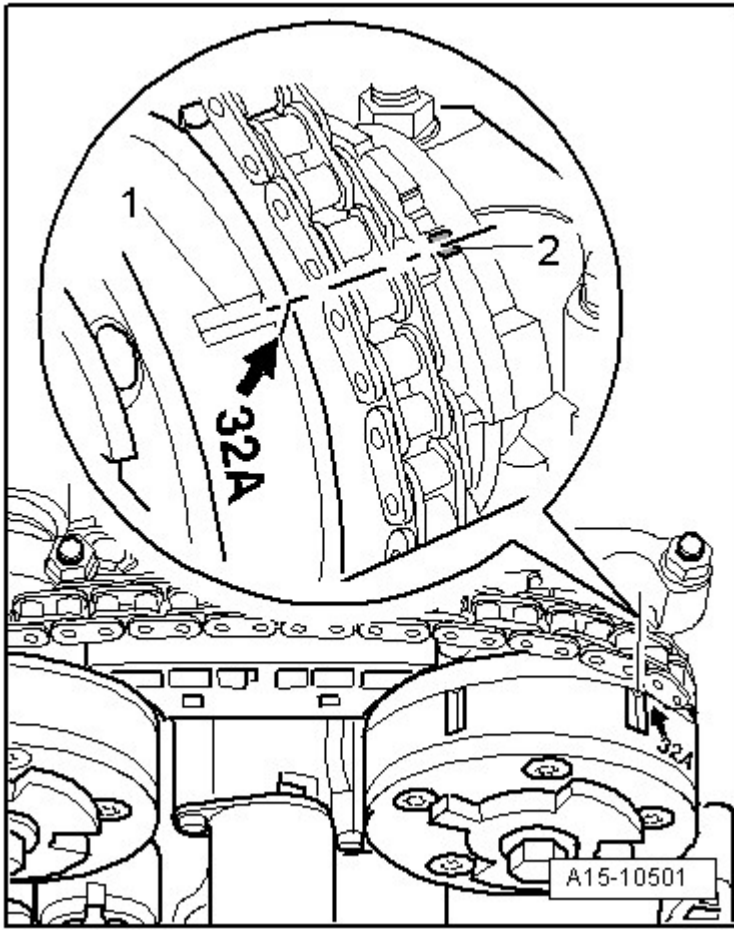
Verifying Installation Marks Of Exhaust Camshaft Adjuster With Marks On Control Housing
